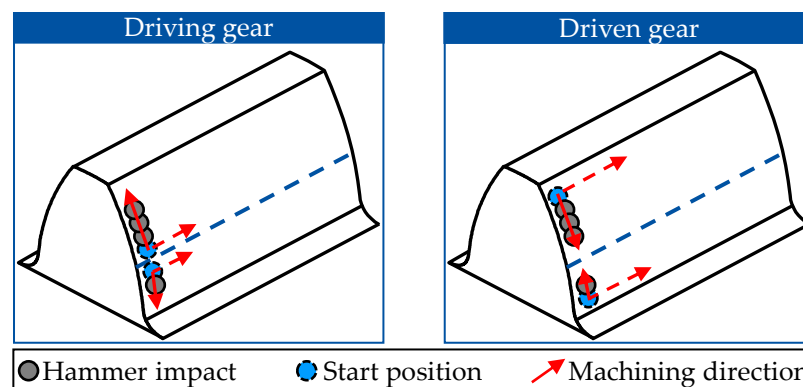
MHP machining direction on the tooth flank for driving and driven spur gears.
